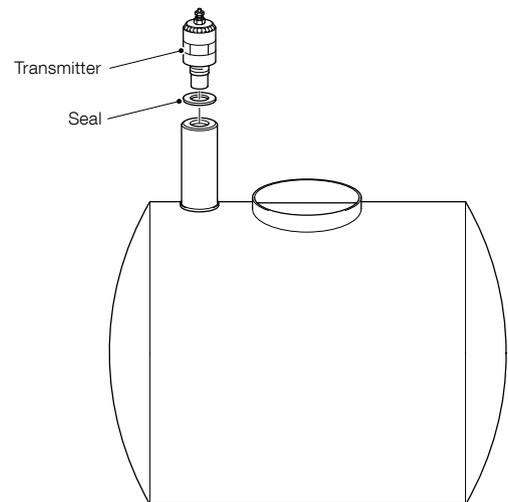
Installing the LST100 transmitter on the mounting bracket using a seal
